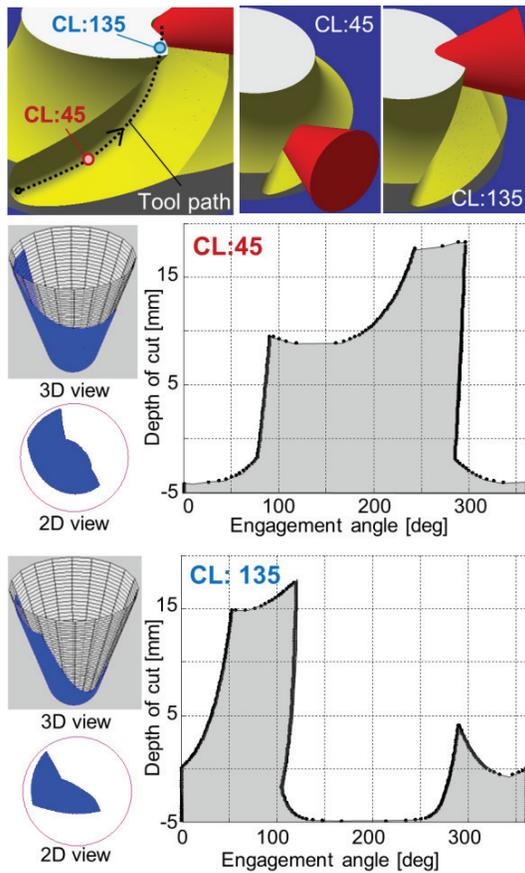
The CWE surfaces for tapered ball-end mill tool
